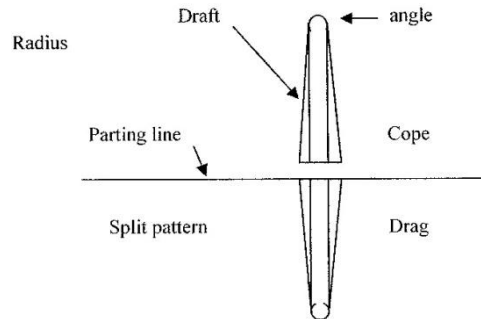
Draft is an essential requirement for sand casting patterns to perform properly.
